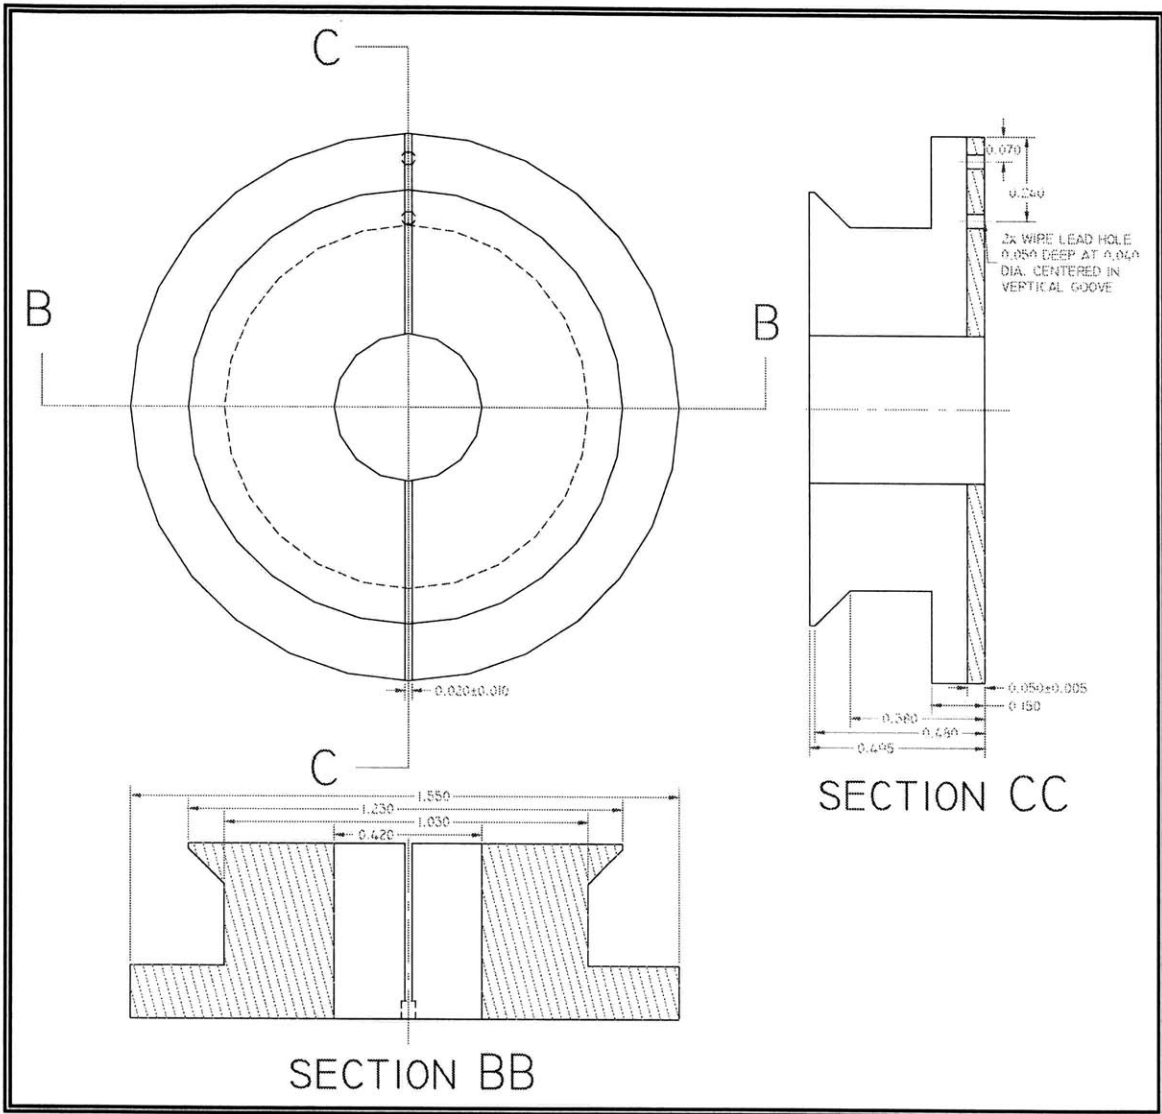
The inlet valve spool is shown in quarter section to relate the detail of the eddy current groove and the wire lead holes
